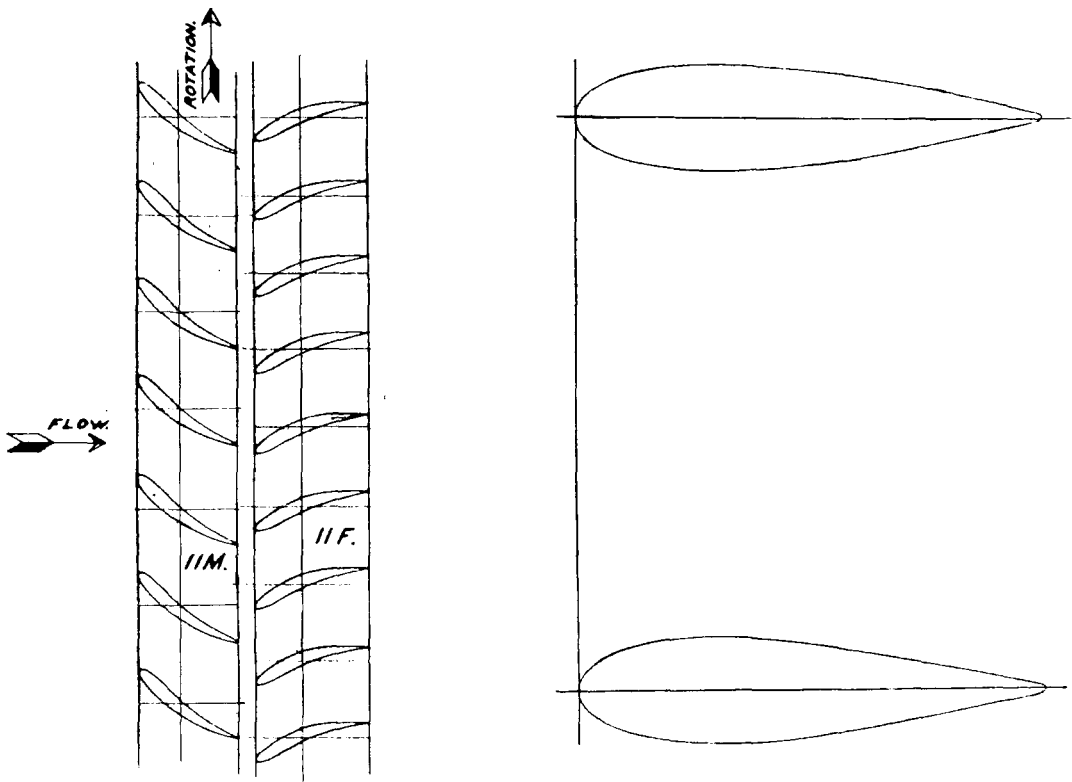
DETAILS OF 'G2' COMPRESSOR BLADING AND STRUTS AT OUTLET END—
